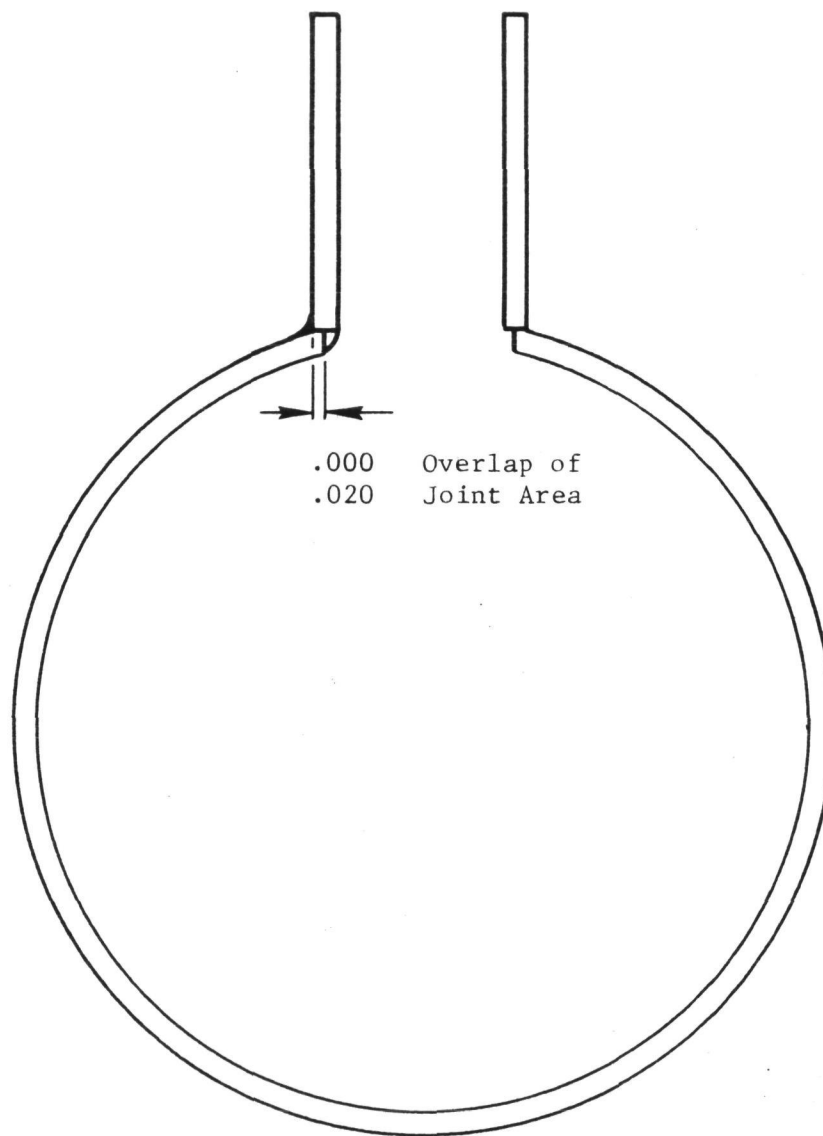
Design of Tube-to-Manifold Weld Joints.
